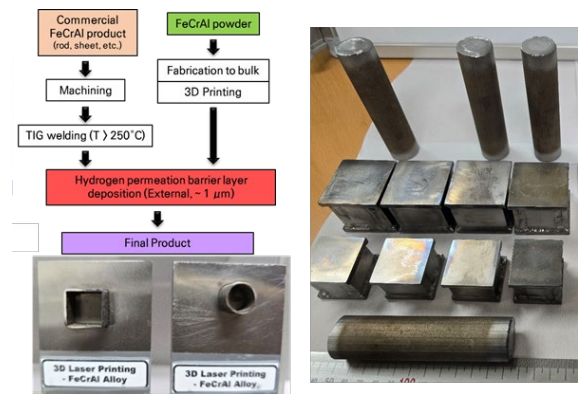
FeCrAl cladding fabrication process using additive manufacturing and welding
